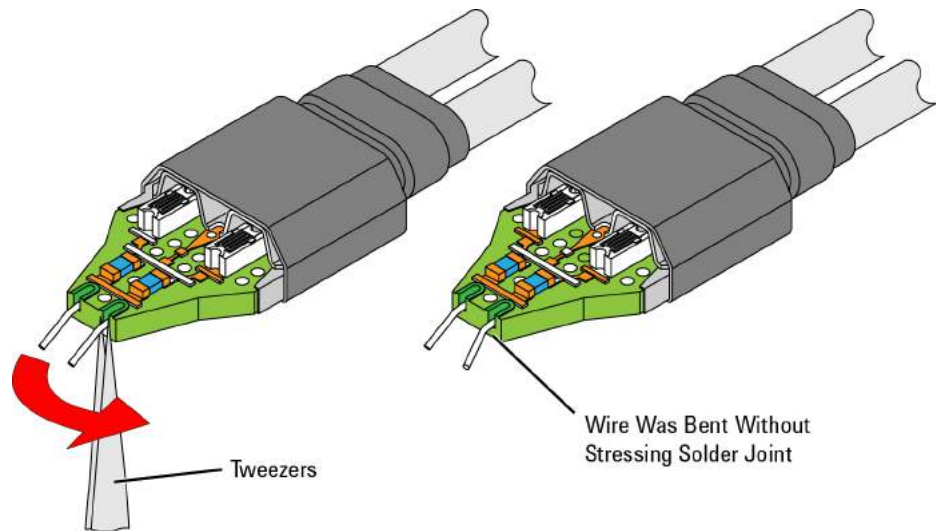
Adjusting Spacing Without Stressing Solder Joint
